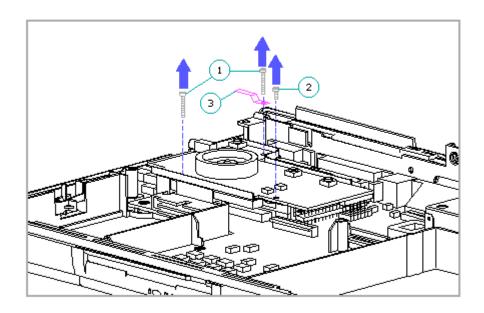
Removing the Power Interface Board Screws and Display Switch Spring
